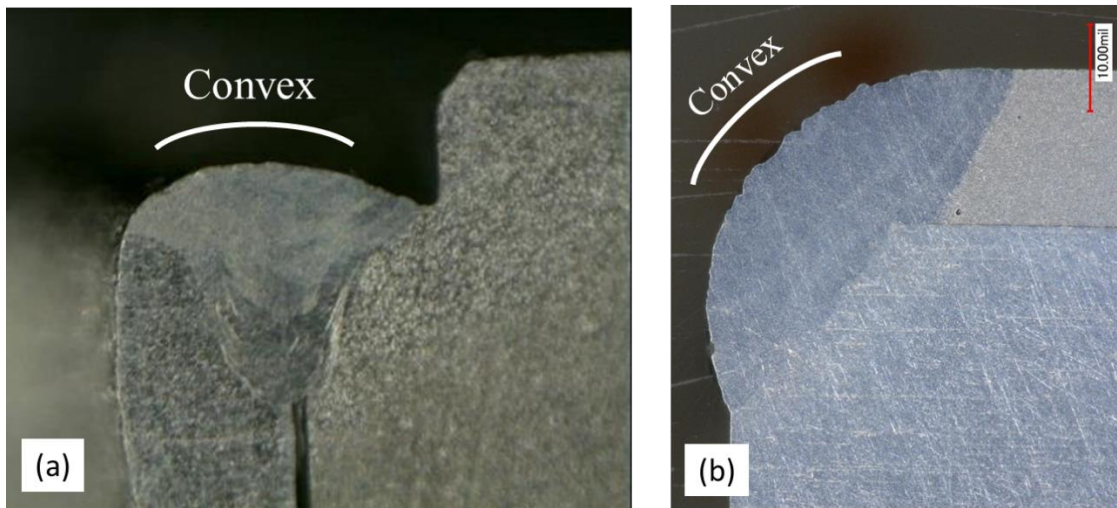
Laser weld sections showing convex profiles produced by including a free corner into the fusion zone; the free corner becomes a defacto filler wire.
